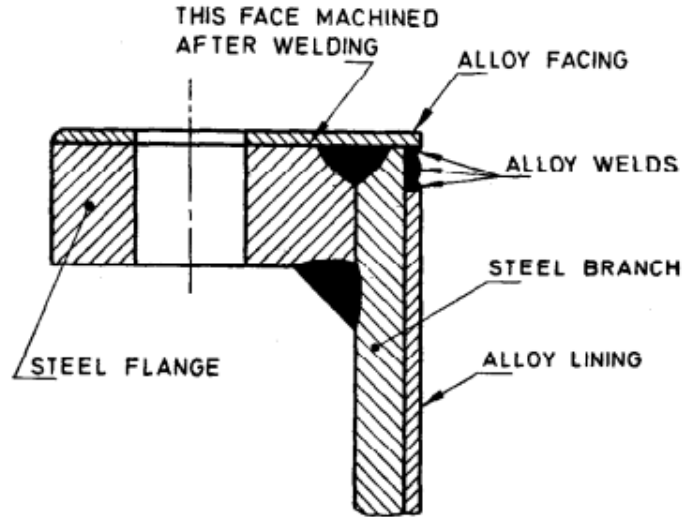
FLANGED OPENING WITH ALLOY FACING
